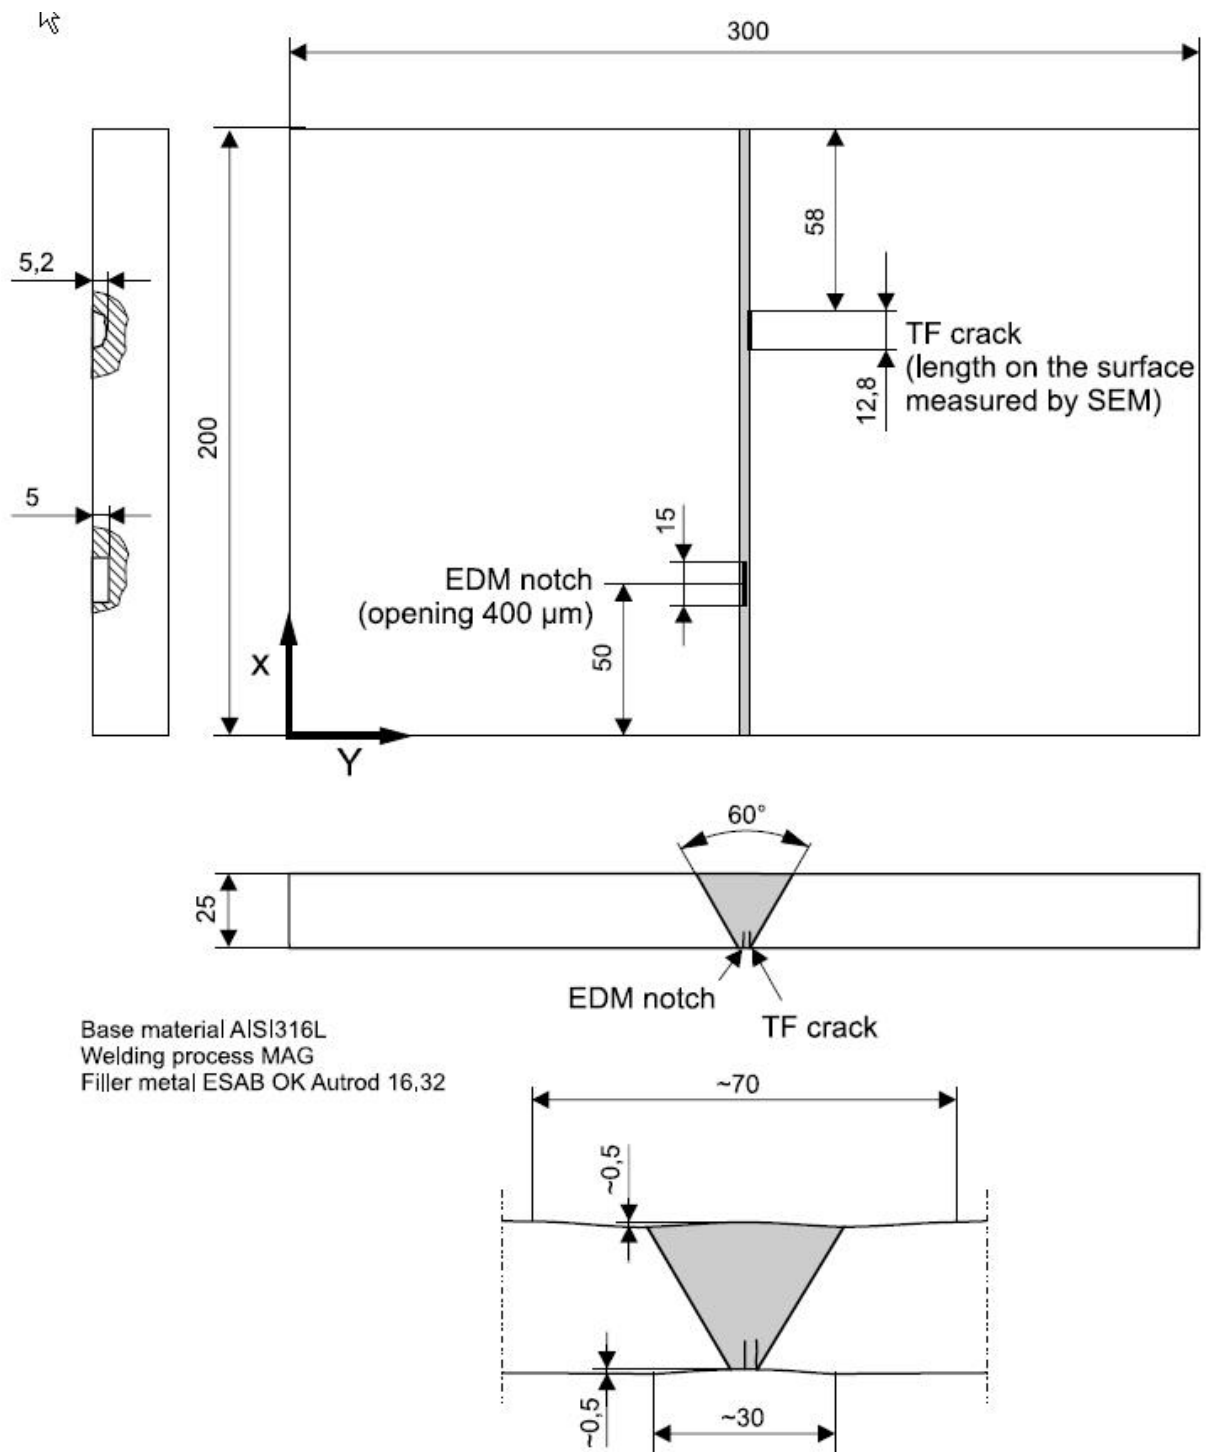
Drawing of TF test piece and location of fabricated TF crack and EDM notch.
